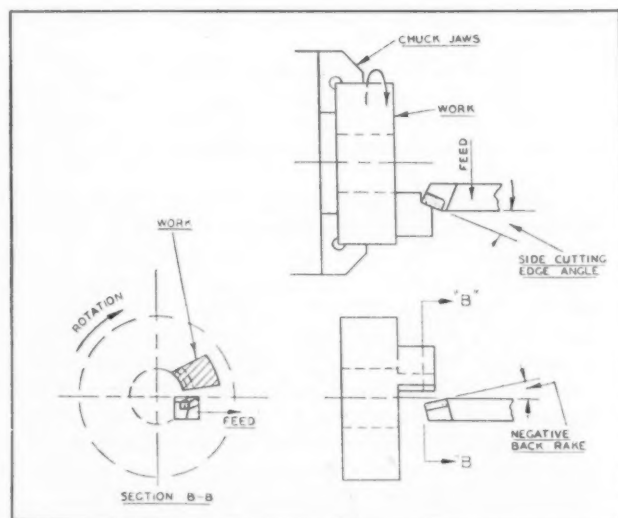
SAME SINGLE-POINT TOOL AS IN FIG. 1, TAKING CUT ON WORK HAVING LESS CROSS-SECTIONAL AREA
